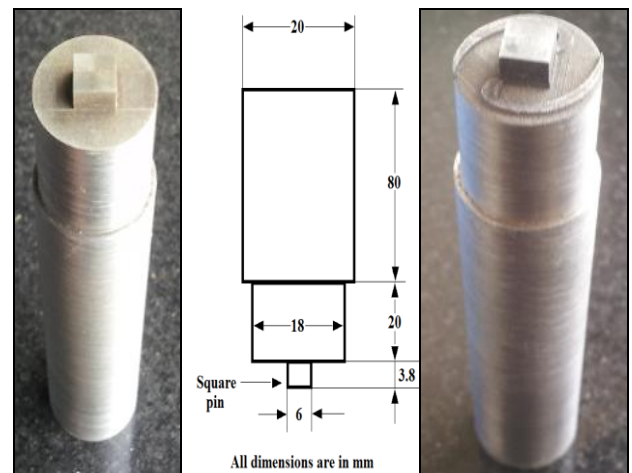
Friction stir welding tool dimensions and geometry (H-13 die steel)^[6]
